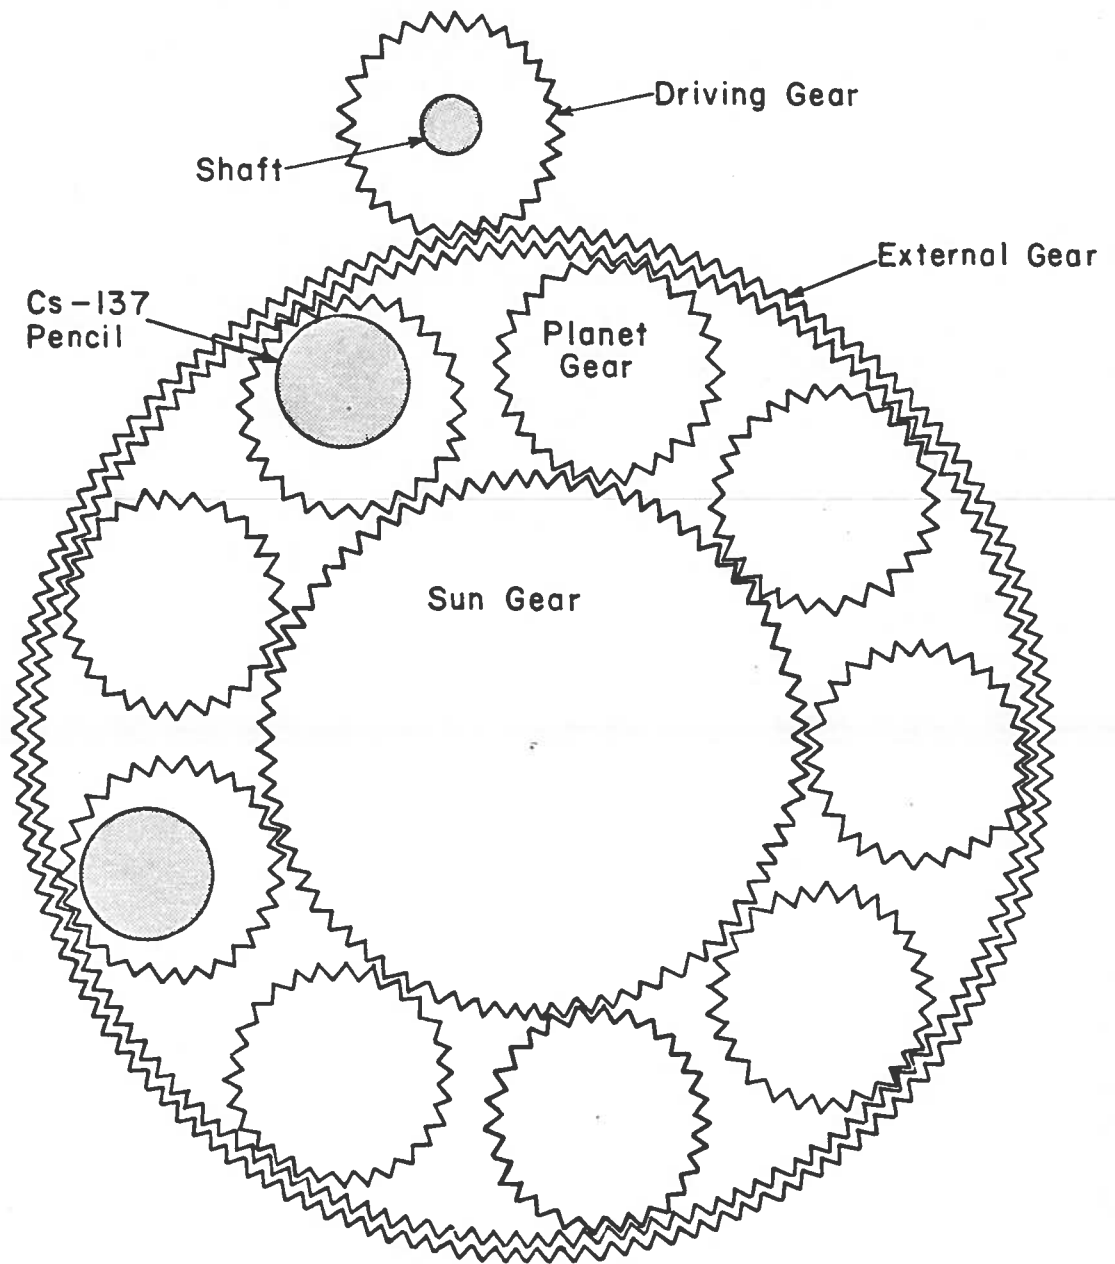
The Arrangement of Gears for the Gear Concept.
